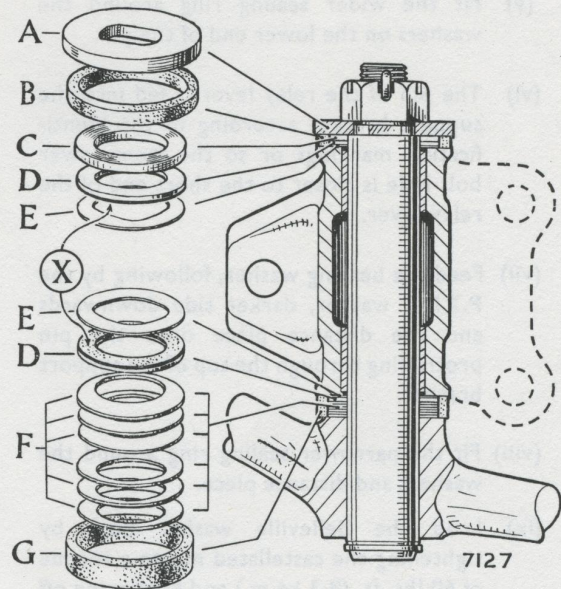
Cross section view through later steering relay lever assembly, note the method of assembly for the Belleville washer pack.
